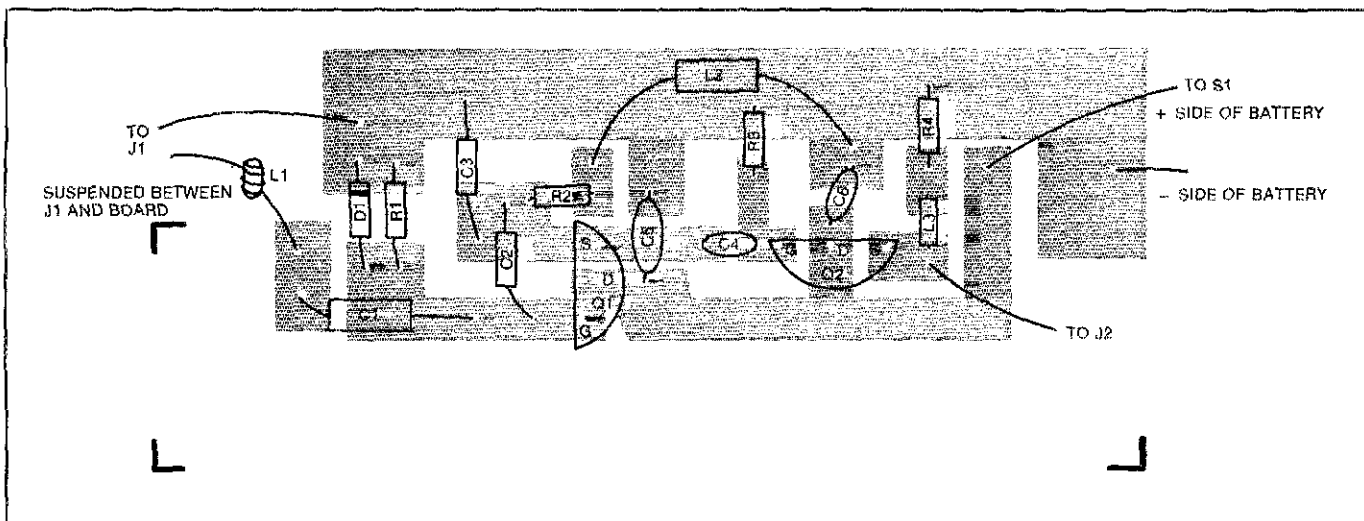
Component layout of the L-meter as viewed from the component side of the board. The etching pattern appears in the "Hints and Kinks" section of this issue.
